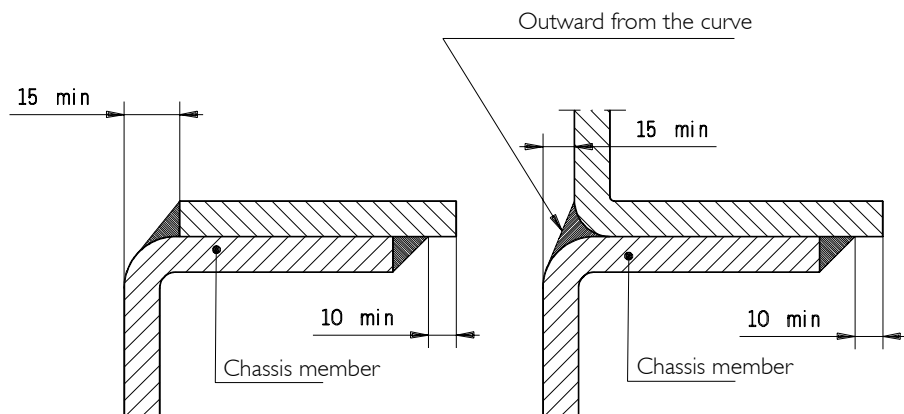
shows the layout of flat reinforcements welded to the chassis member. Figures 2.8 and 2.9 show the recommended layout for pieces over the chassis members and the attachment of L-shaped reinforcements.
